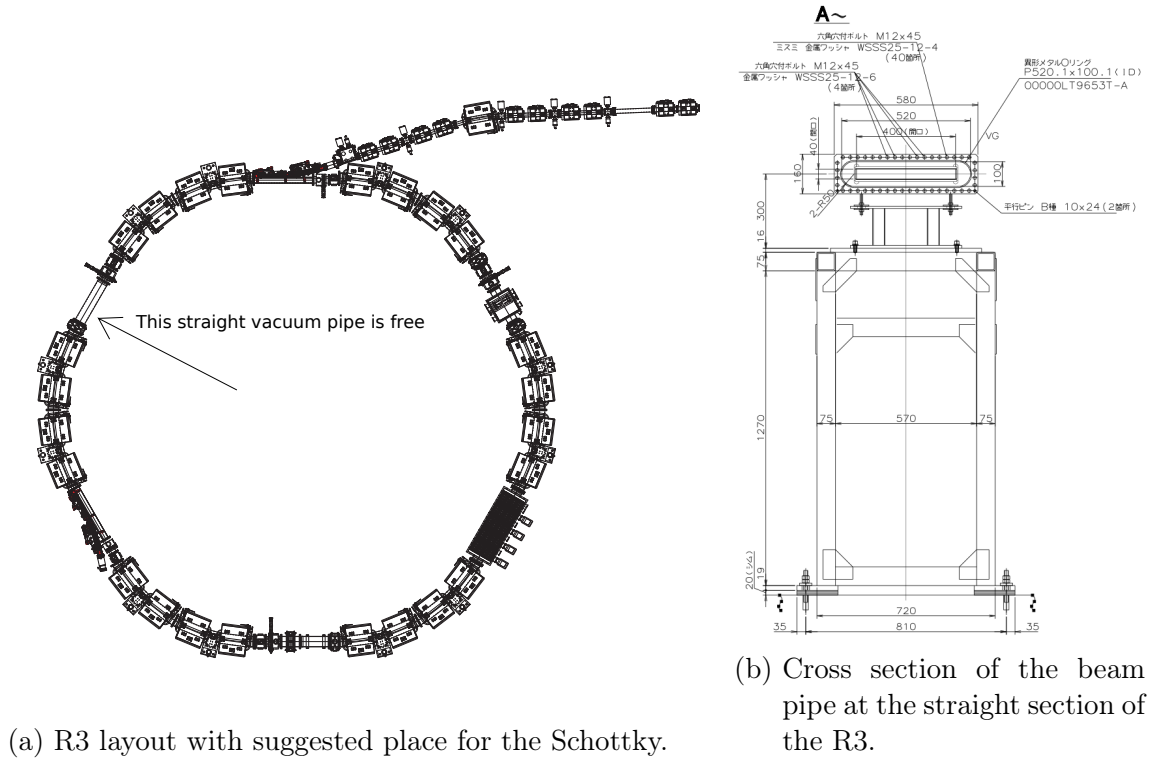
R3 storage ring layout and beam pipe blueprint.
